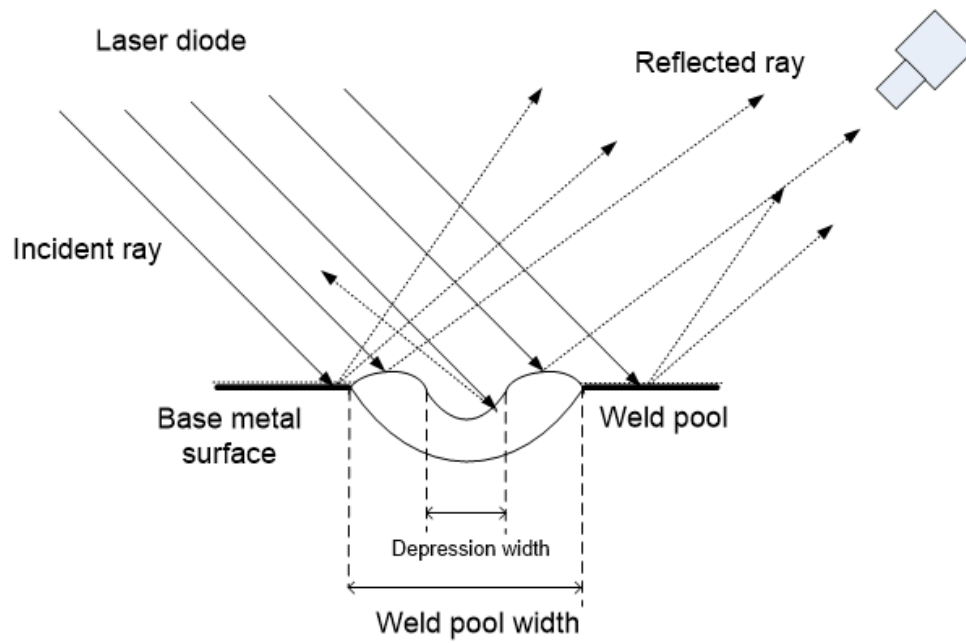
The tracing ray of laser light on weld pool surface
